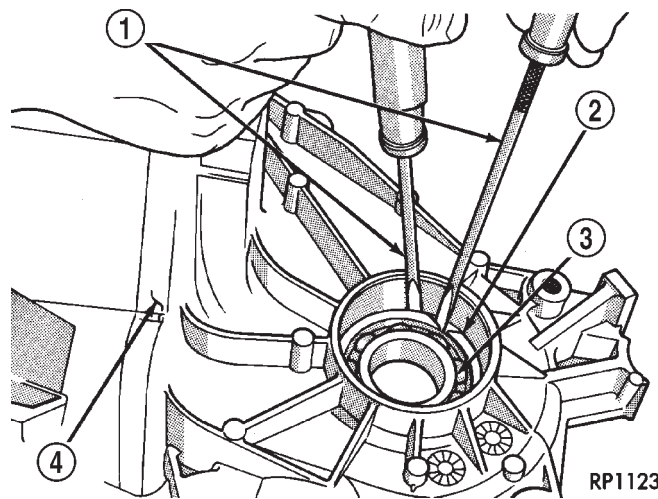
Front Output Shaft Bearing Retaining Ring Removal
